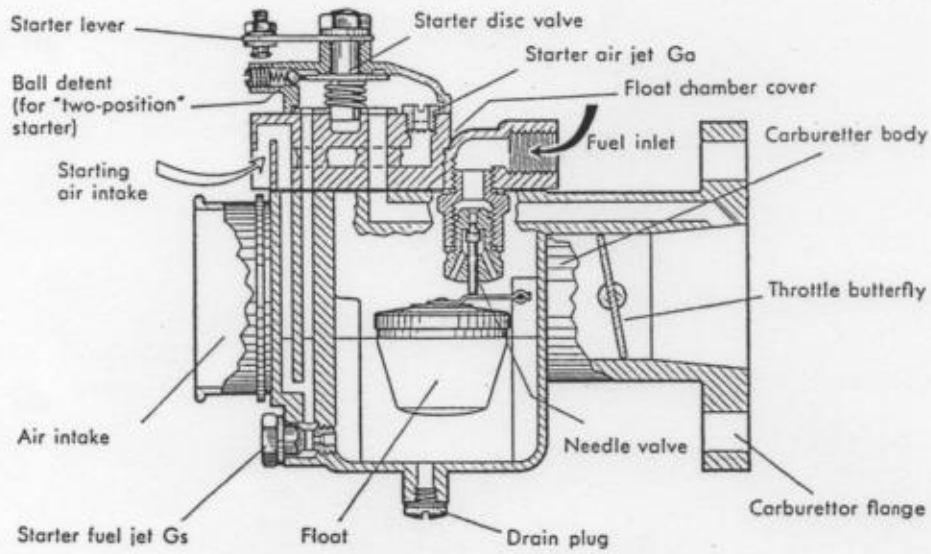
HR Downdraught Carburettor – Schematic Section through Float Chamber
